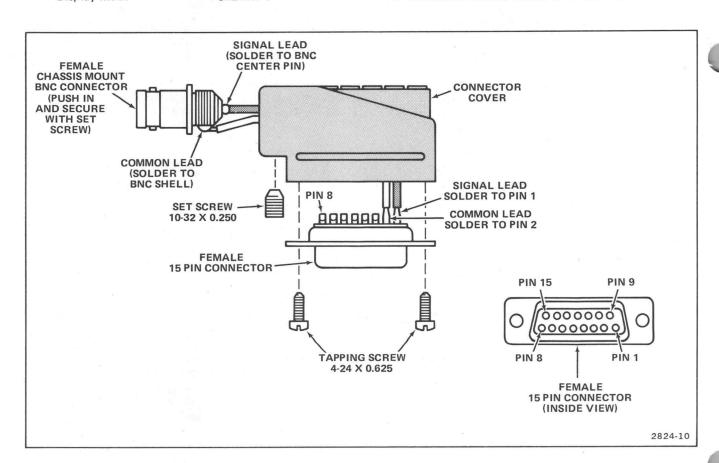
Assembling the photometer probe-to-bnc adapter.
